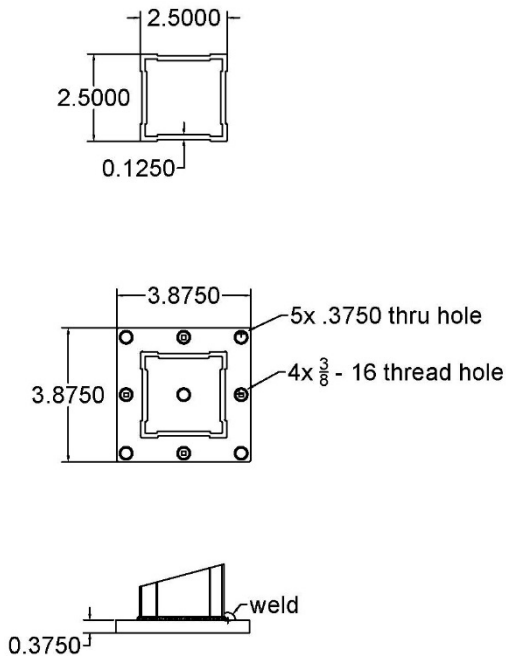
2.5 IN. WELDED POST
